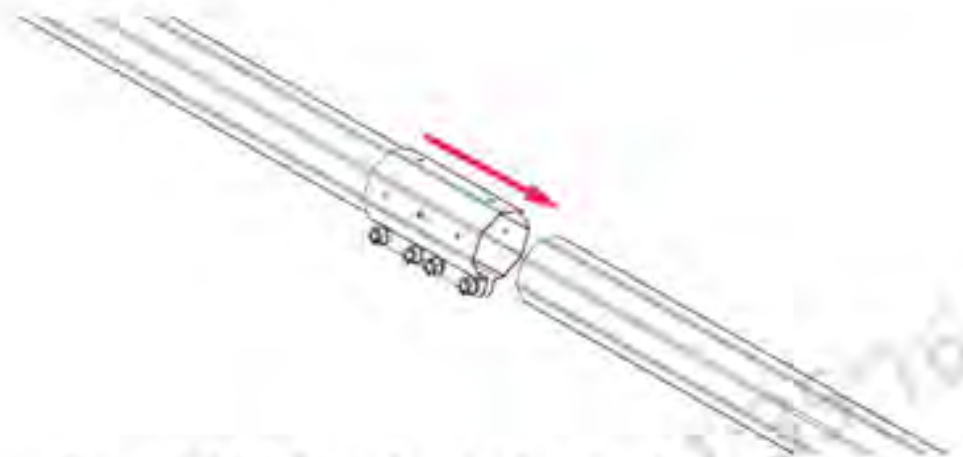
1-Piece Coupler Between Torque Tube Ends
